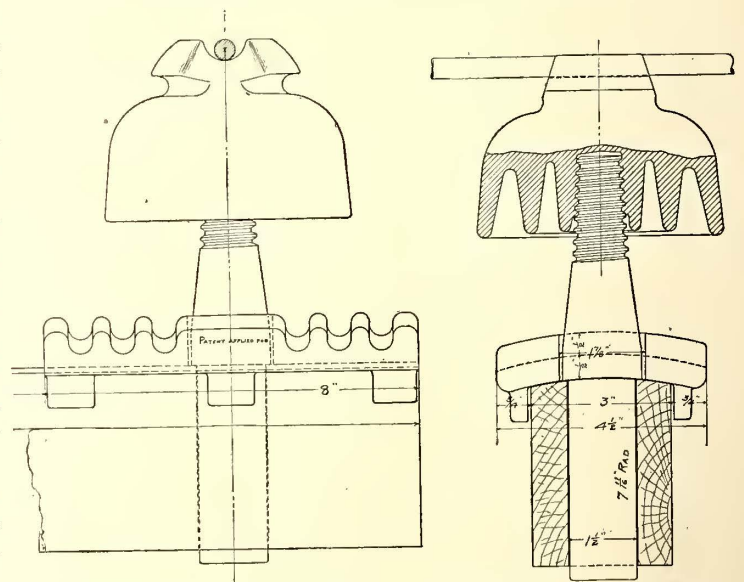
END ELEVATION AND SECTION OF AUXILIARY INSULATOR FOR HIGH-TENSION FEEDER LINES
